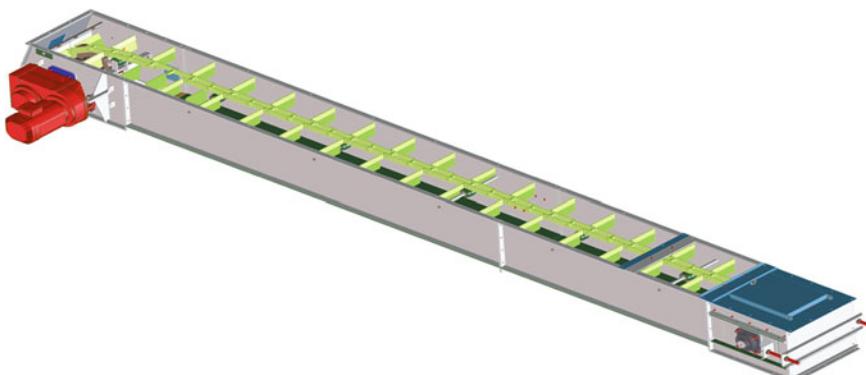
Constructional drawing of a drag chain conveyor by Knoblinger [5]
